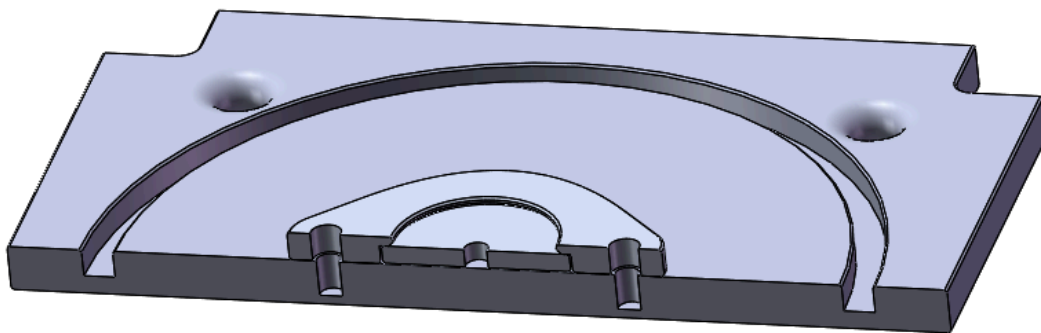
Cutaway view showing how clamp system secures AeroBoom to endplate
